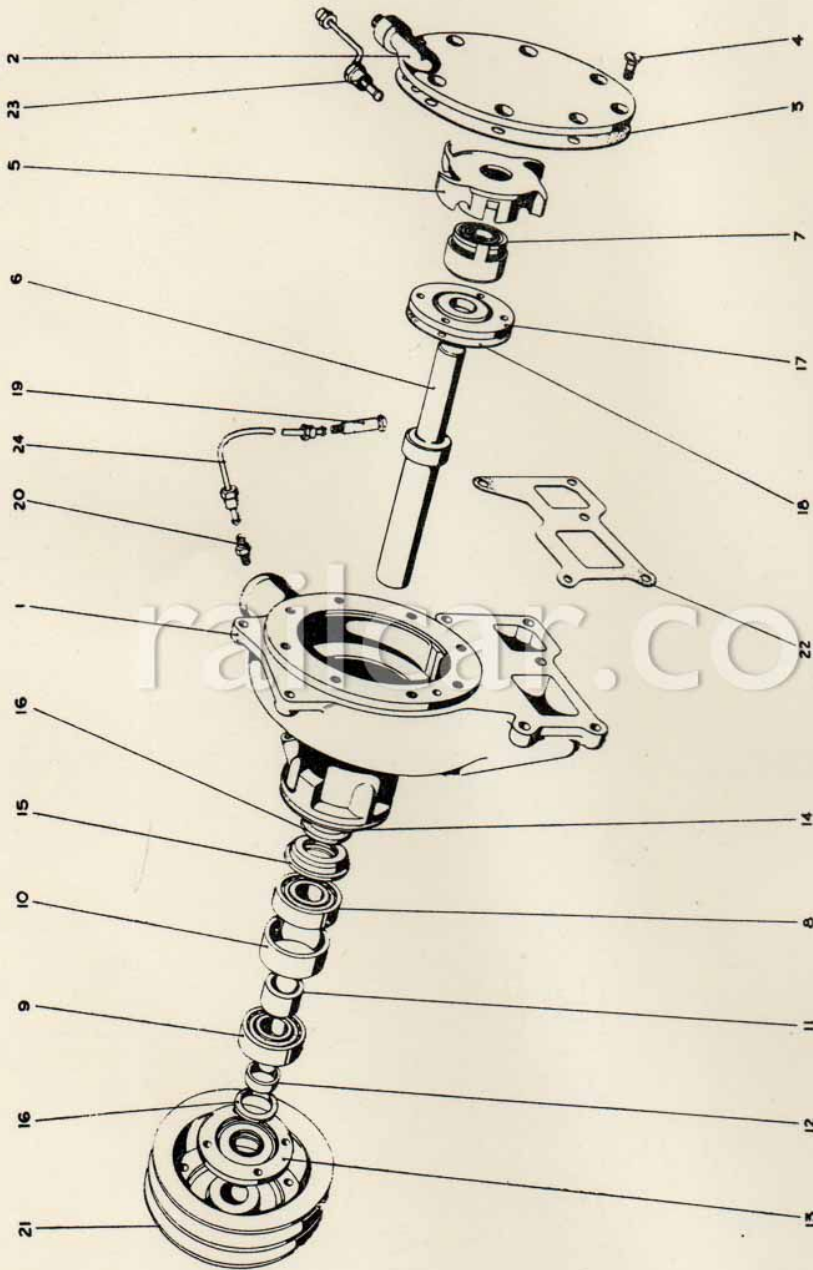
EXPLODED VIEW OF WATER PUMP.
